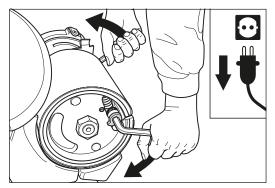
Clamp the abrasive sheet using the two hexagonal socket wrenches (size 10 mm).
